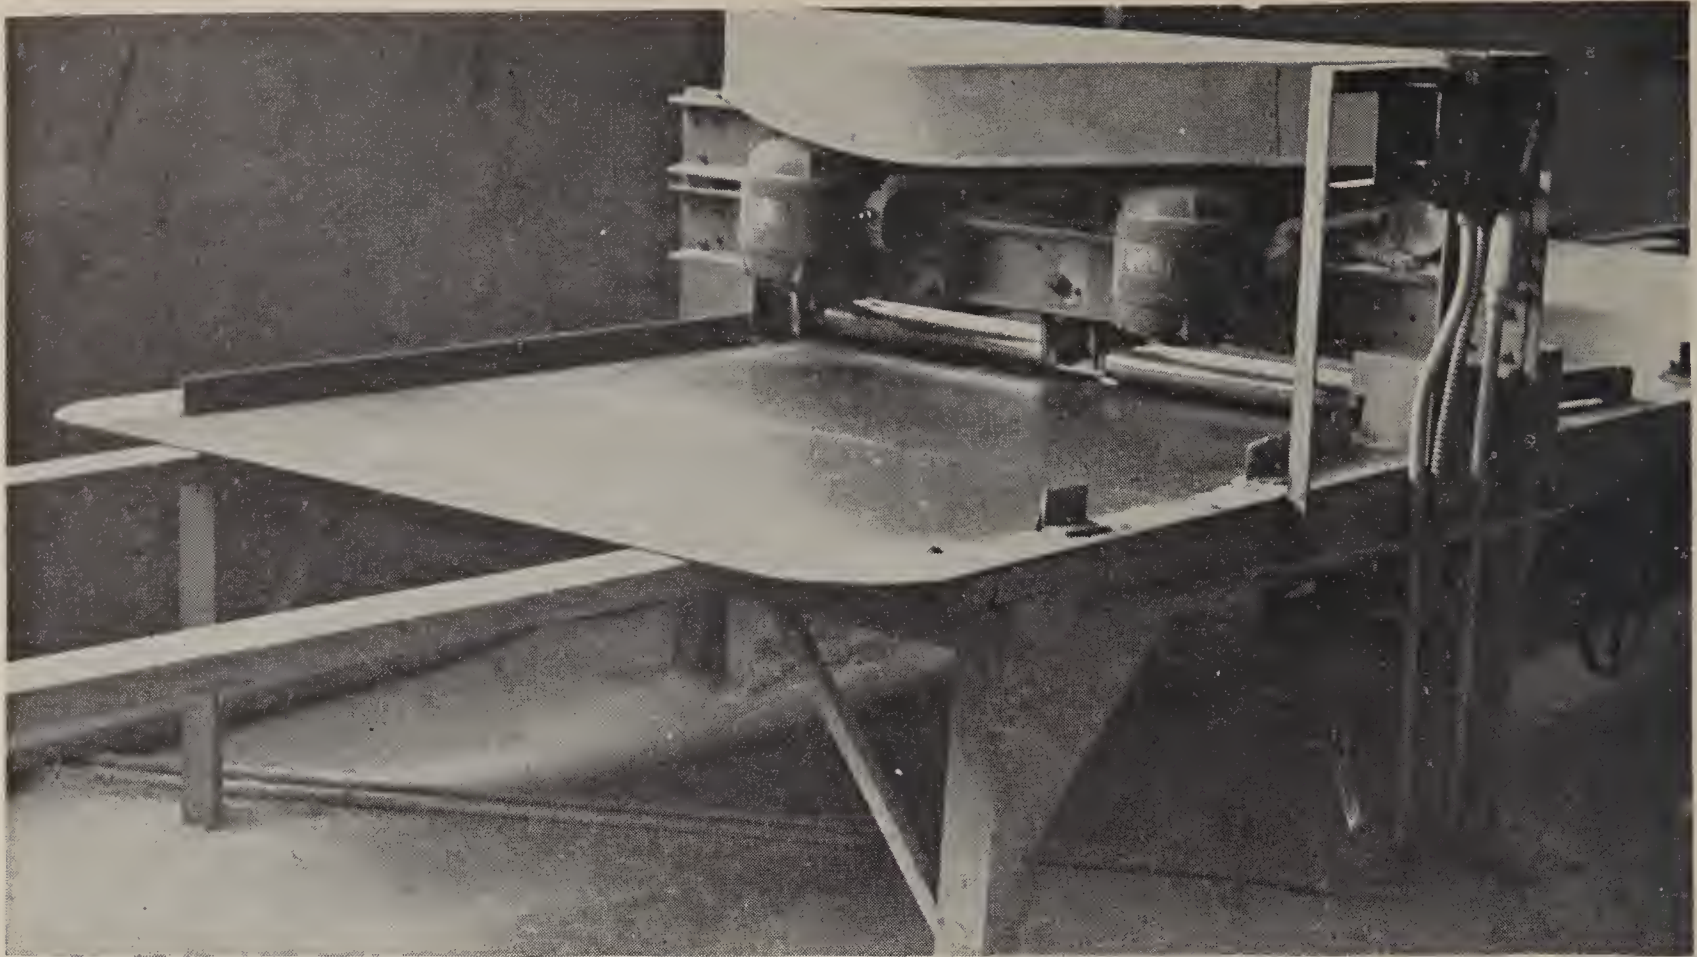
Equalizer equipped with cutter knives on vertical spindles for trimming plywood to exact width.
